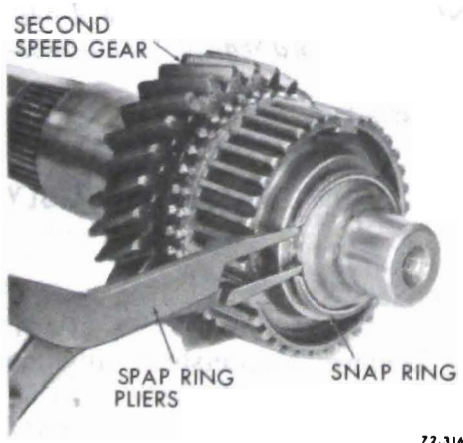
Installing Second-Third-Speed Synchronizer Snap Ring
